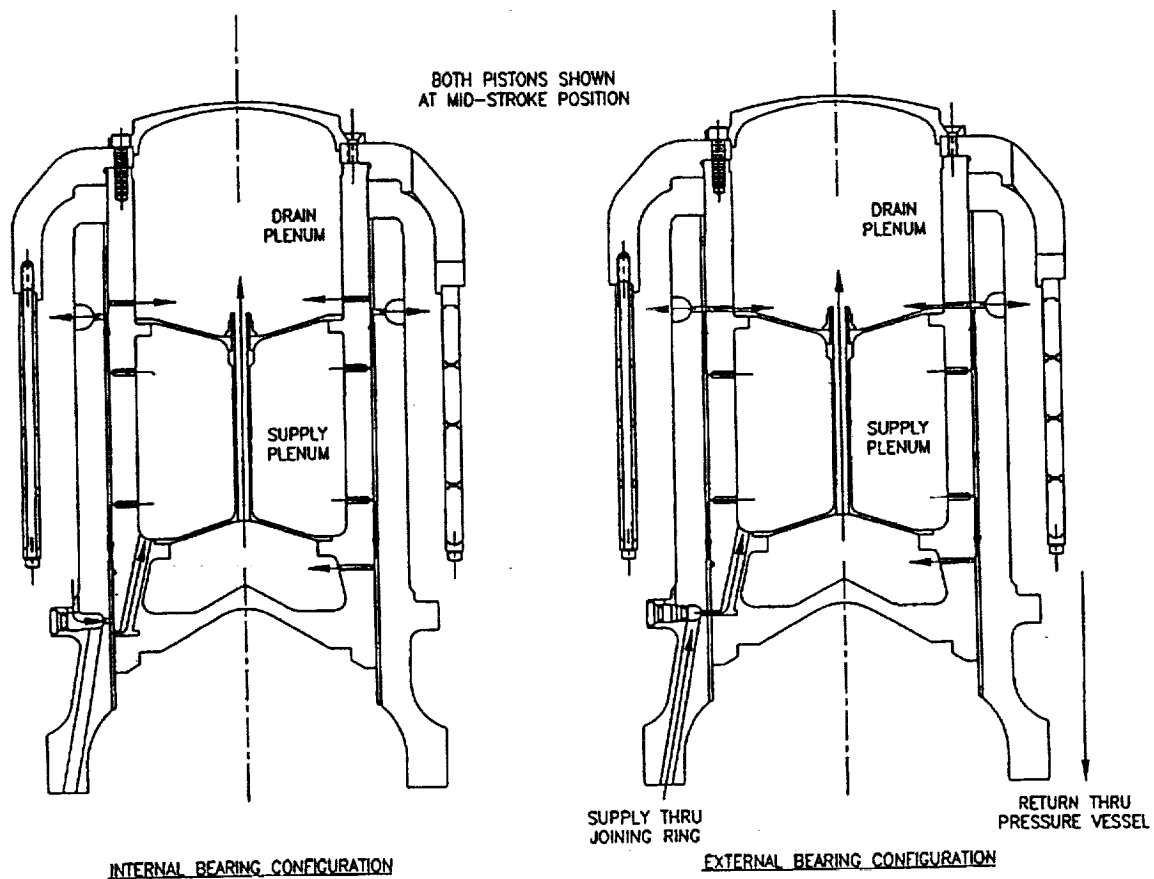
shows the arrangement for operation on externally supplied bearings. The port connection between the load side gas spring and the bearing plenum is plugged. A rod with bearing supply ports located at midstroke is used. Gas from the external loop enters the plenum through the bearing supply ports. Gas return to the loop is from the head-side gas spring, which is the normal drain plenum for the bearings.
